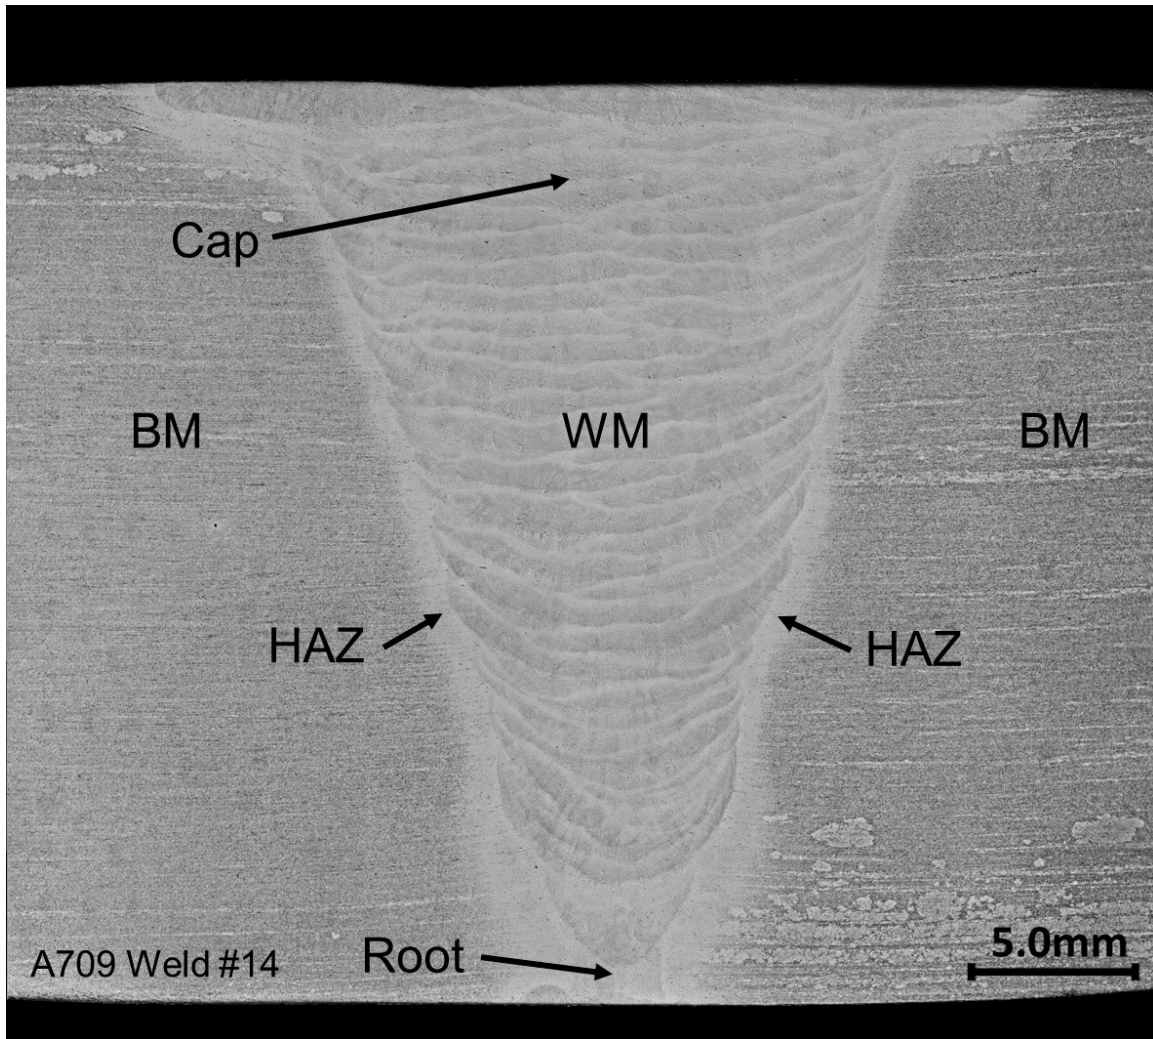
Optical image showing cross-section of the weld W14.
